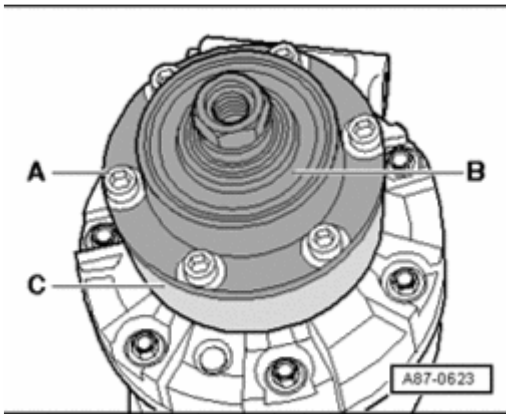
Removing Bolts & Using Commercially Available Band Wrench (With Webbed Band) To Provide Support At Drive Plate
